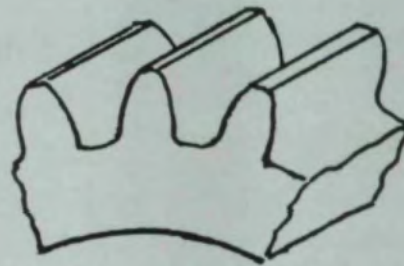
Spur Gear Tooth - Zero Helicoid
